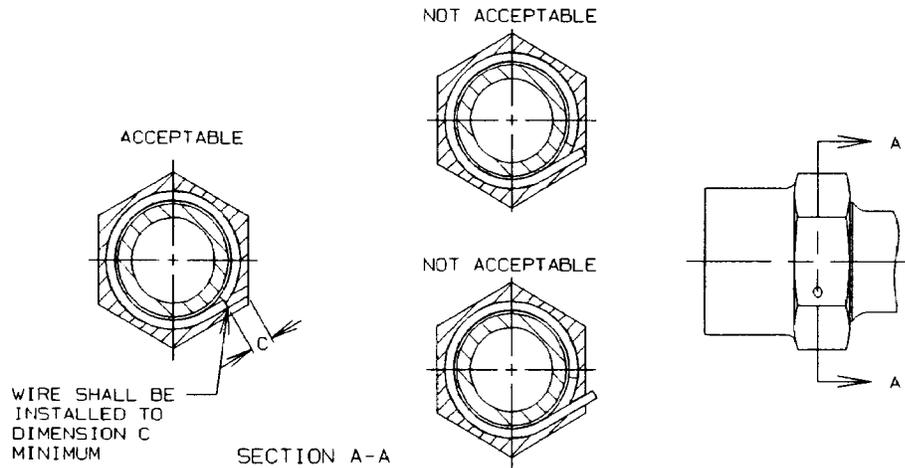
INSTALLATION, SWIVEL NUT RETAINING WIRE
